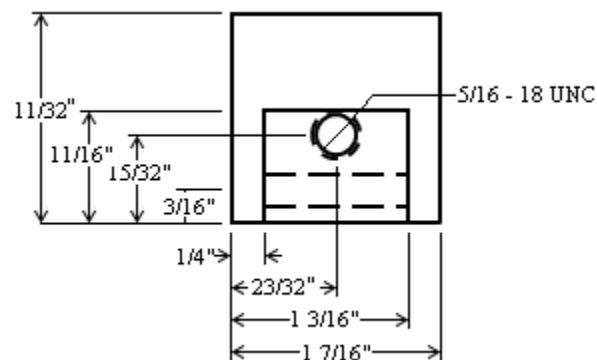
Back view Hook-SH6 (dimensions in inches).
